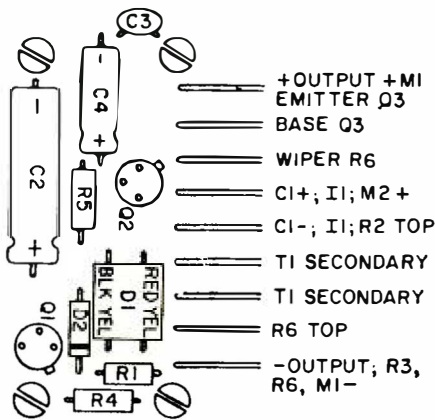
Parts arrangement on component side of the printed board. Observe polarity of the capacitors.
